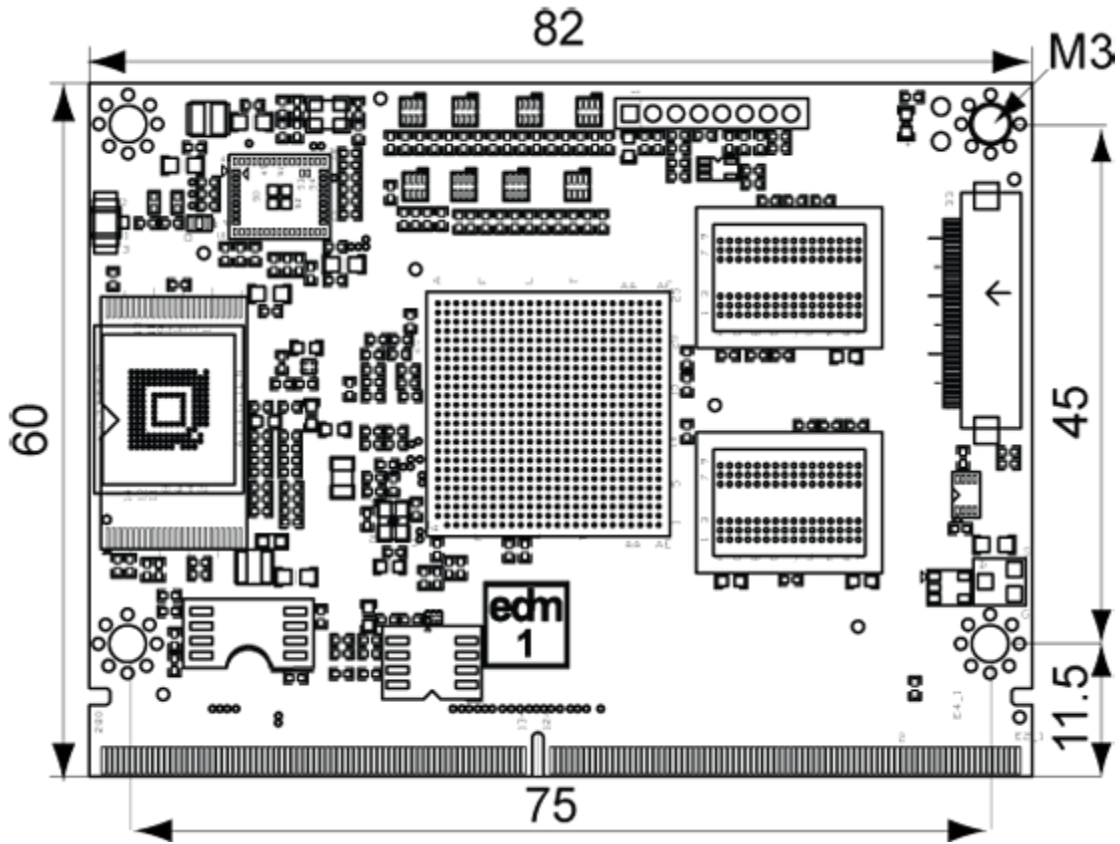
EDM1-CF-IMX6 System on module dimensions (Dimensions in mm)
